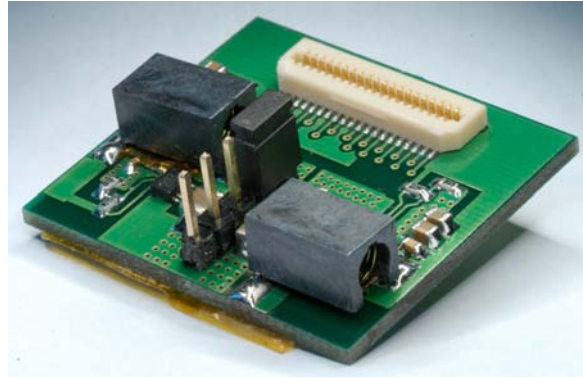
Photograph of the L_AirCore converter PCB with external air-core inductors.
